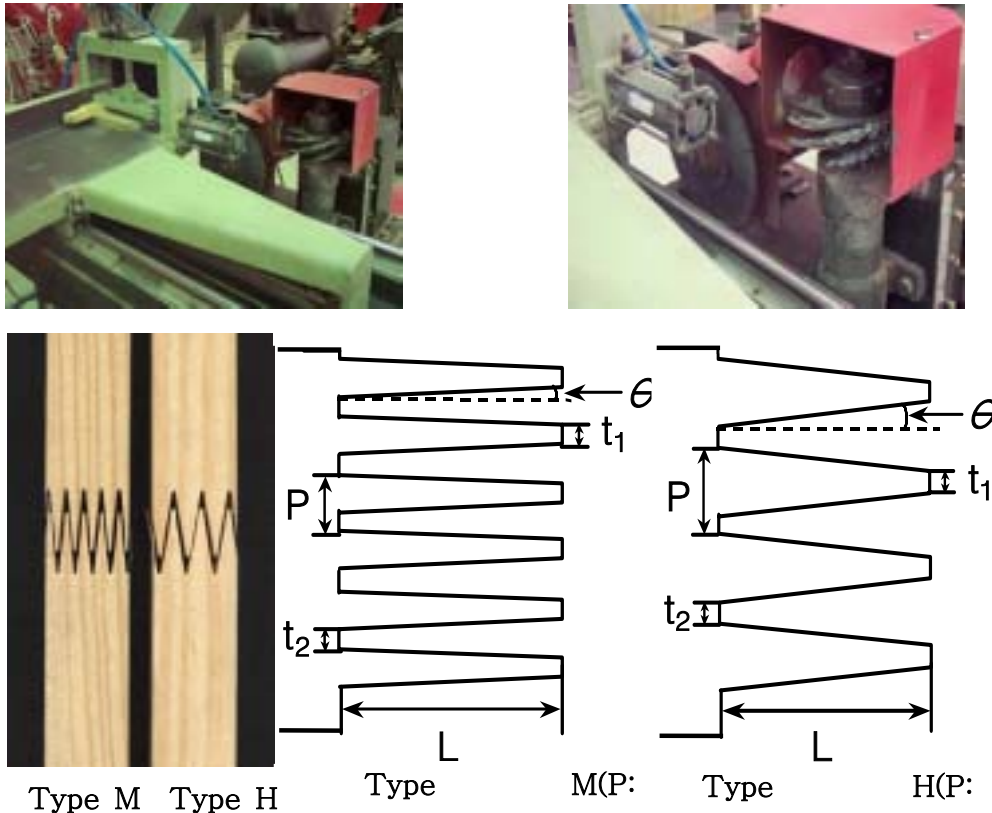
The machine of making finger-joint and profiles of finger-jointed specimens.
